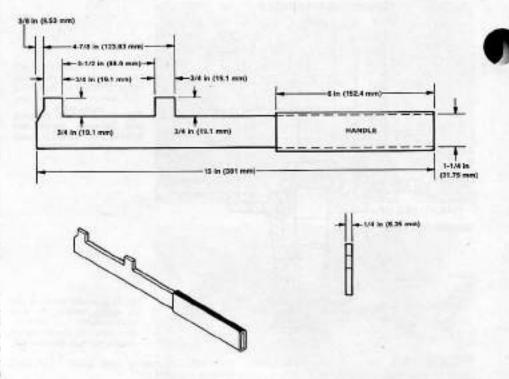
Diagram of differential bearing adjuster wrench which must be fabricated locally.
